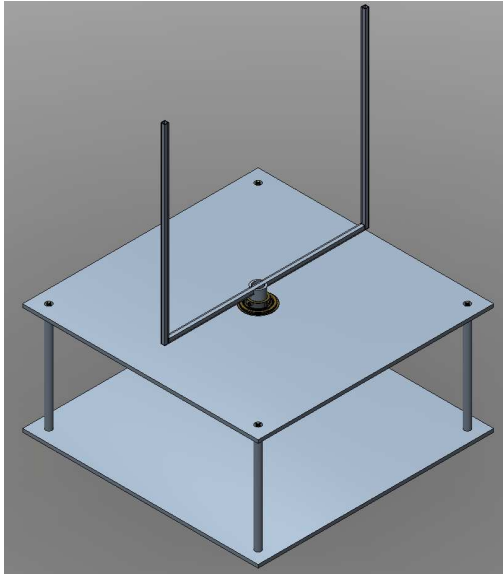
Model of the chassis assembled with the LED array support frame.
